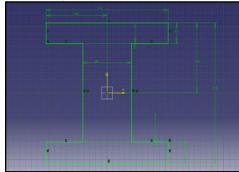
I- Section for Grider (for Robotic Crane)
